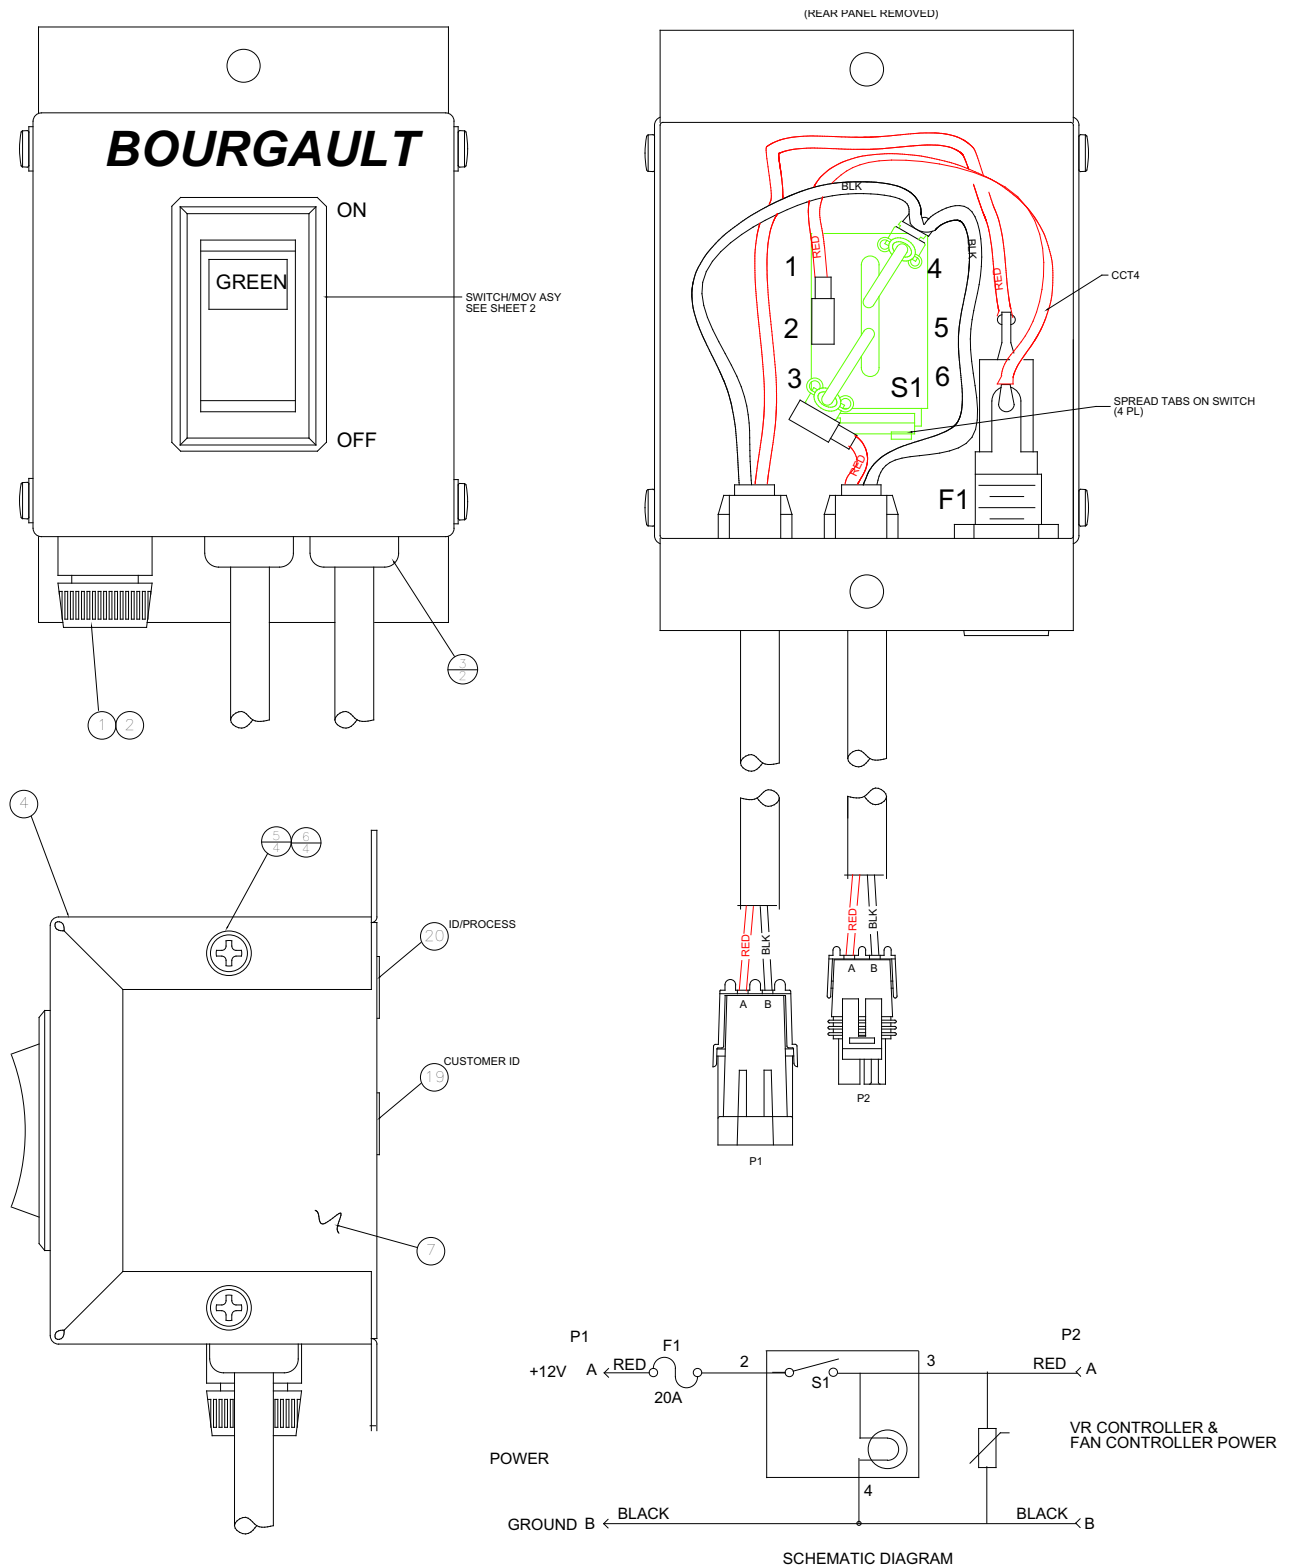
VR Controller Power Switch (In the TRACTOR Cab) - 3130-33
